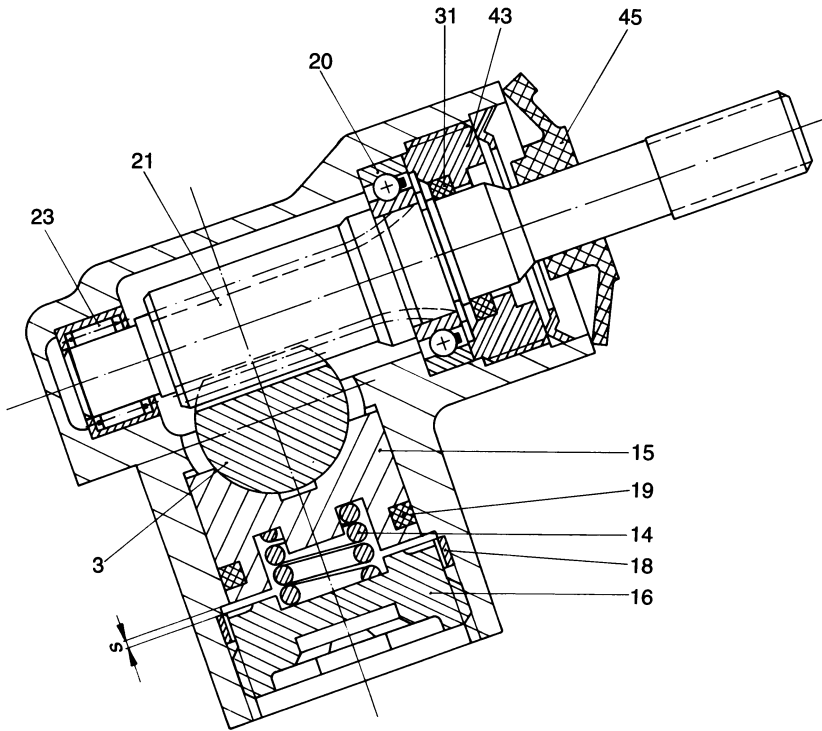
Rack- and- pinion steering by ZF; section through pinion gear, bearing and rod guide. The distance ring 18 is used for setting the plays, and the closing screw 16 is tightened against it. The O-ring 19 provides the damping function and prevents rattling noises.
